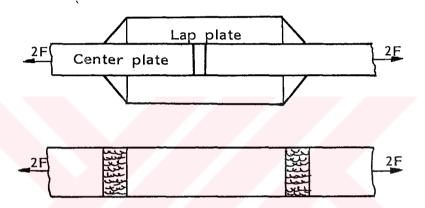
The general arrangement of the transverse fillet weld joint investigated
